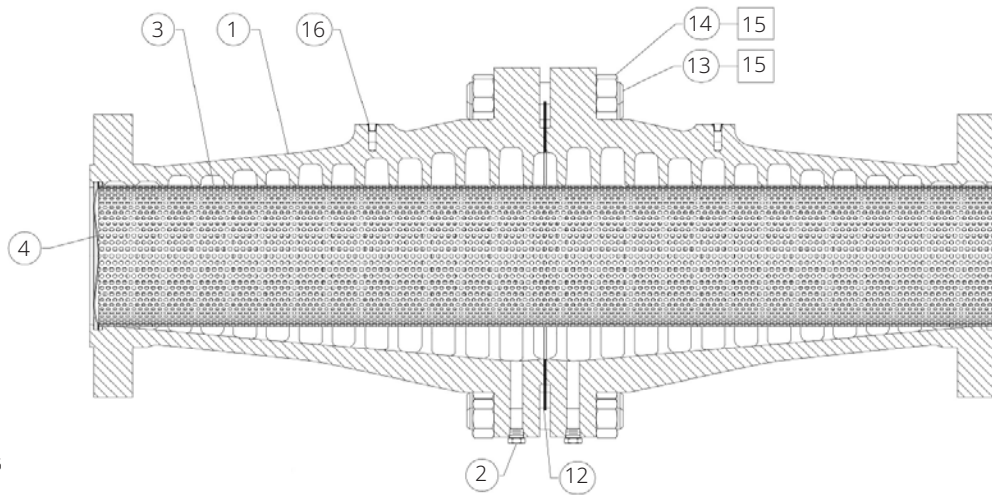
Fisher WhisperTube Exploded View, NPS 2 through 6
